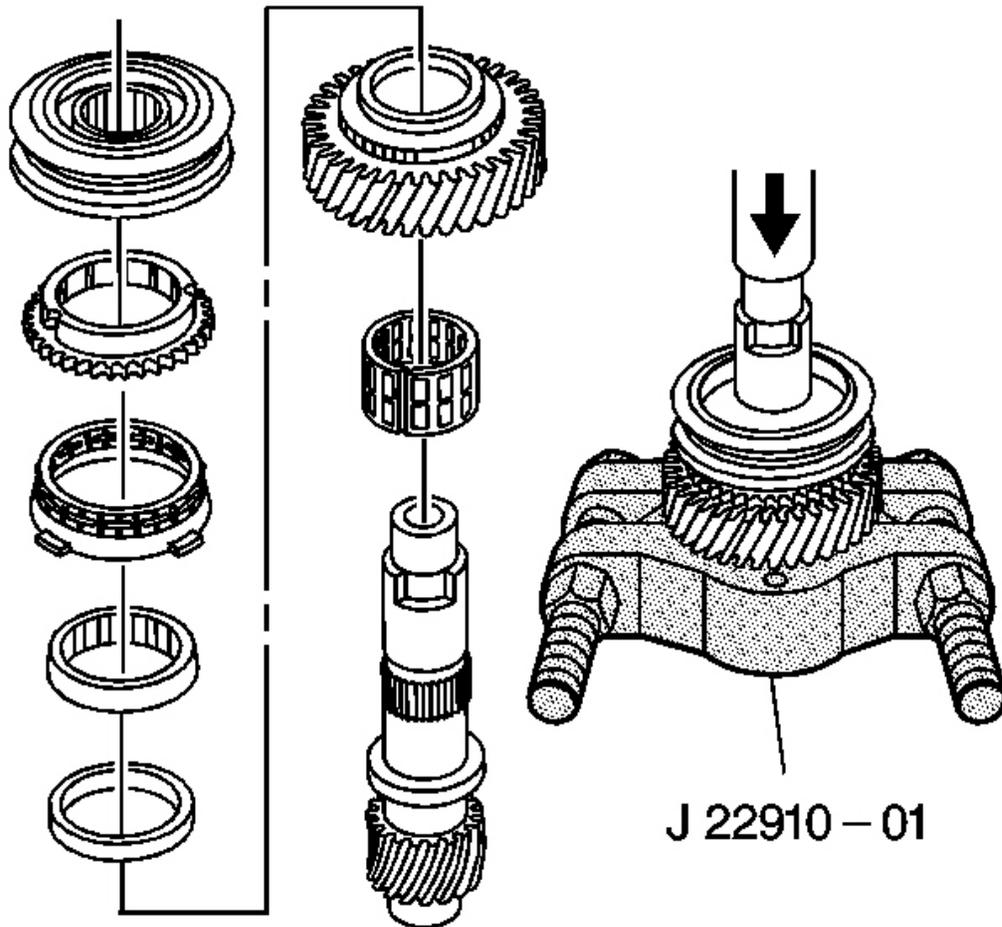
View Of 5th/6th Speed Synchronizer Assembly, Rings, Cones, Washer & Needle Bearing
